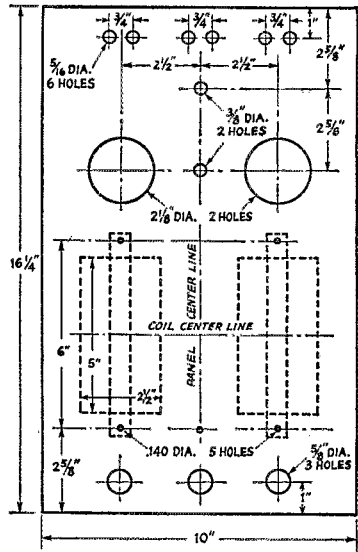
Panel layout of holes, showing dimensions of balun coils. Coil centers should be at least $4\frac{1}{2}$ inches apart.
